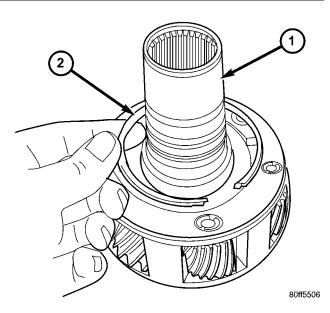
Install Input Gear Retaining Ring 1 - INPUT GEAR 2 - RETAINING RING
